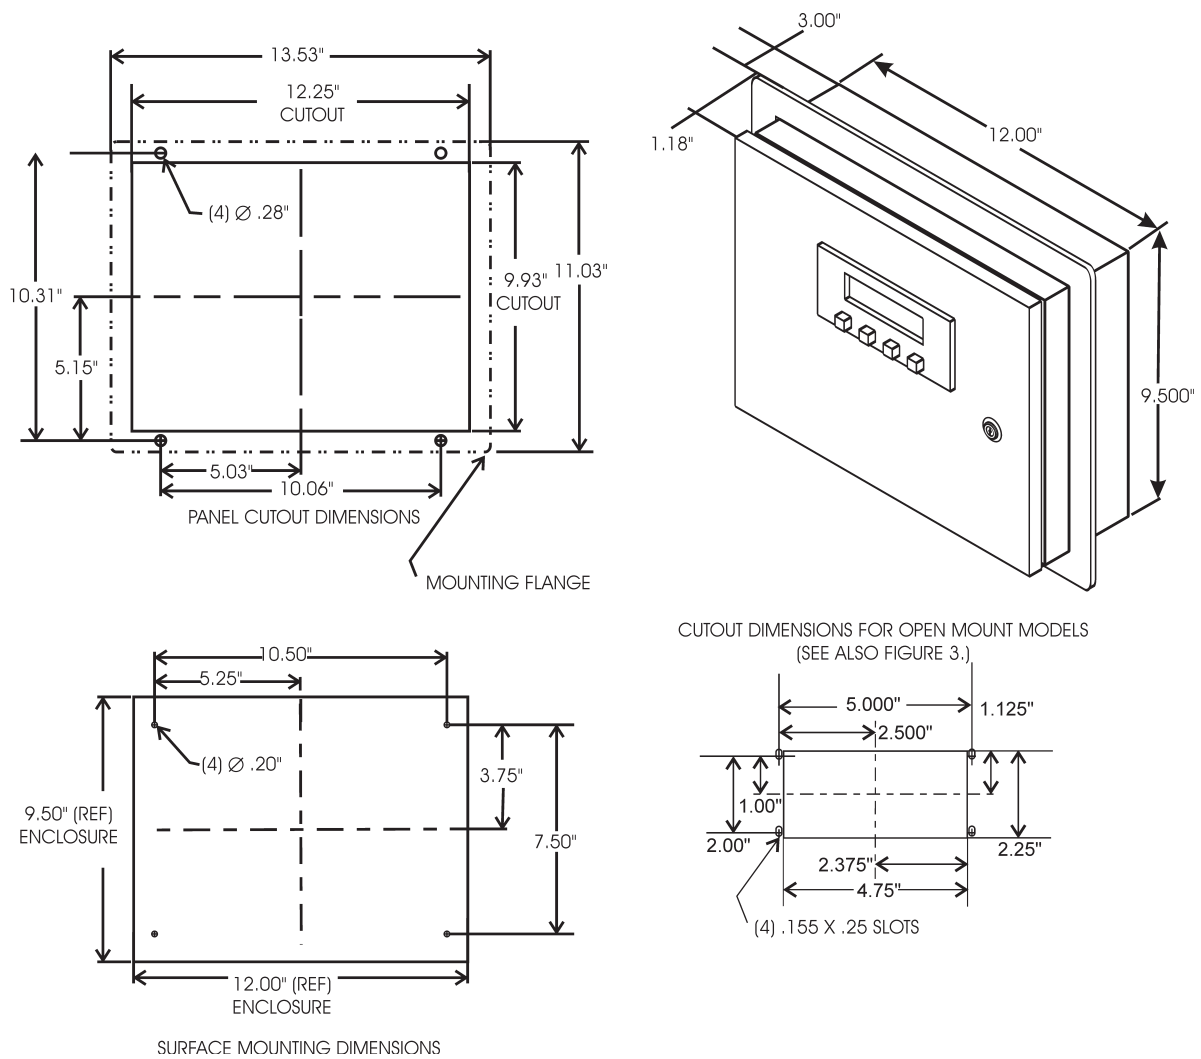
Panel & Surface Mounting Dimensions: Series C-07720 Draft Control System.
